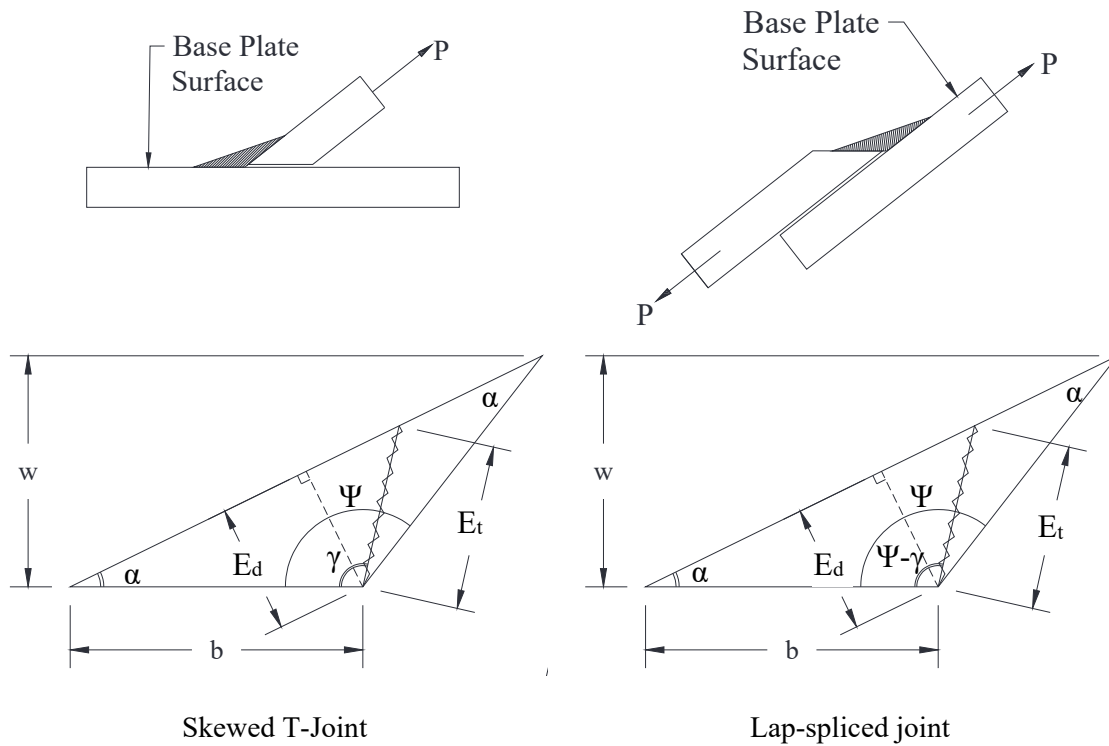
Fig. H. Fillet weld analysis for Skewed T-Joint versus beveled lap-splice joint.
